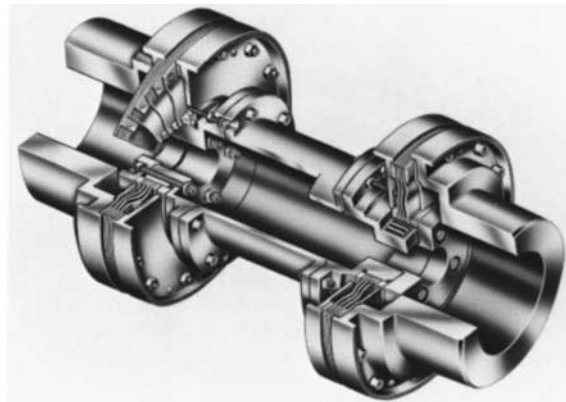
Cutaway view of diaphragm coupling assembly showing multiple convoluted diaphragms. (*Zurn Industries, Inc., Mechanical Drives Div.*)
